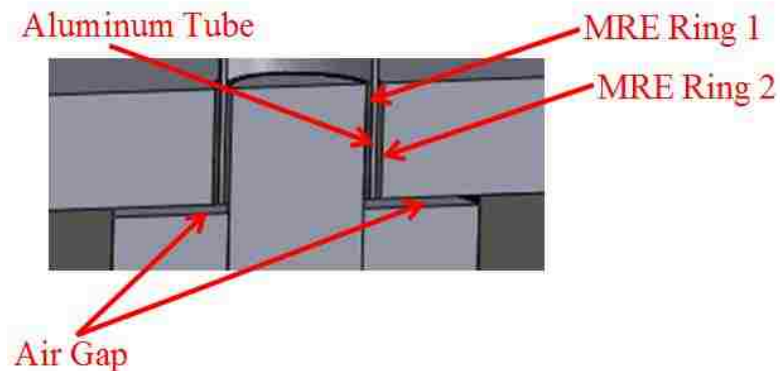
Detailed view of the MRE rings around the aluminum tube.
